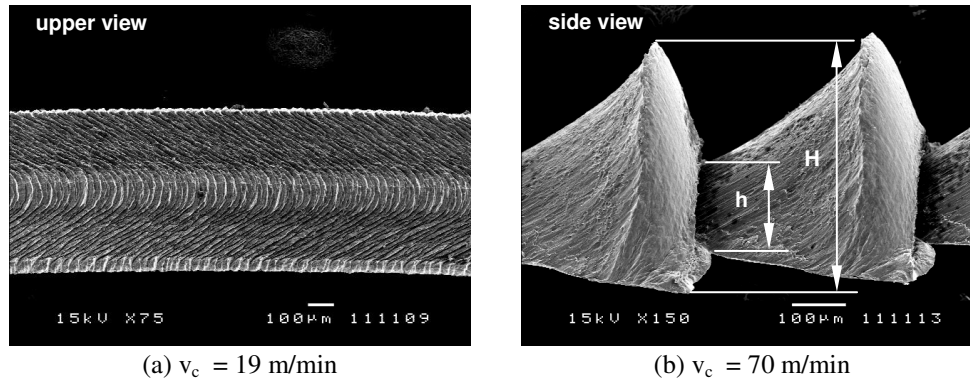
Chip (a) continuous and (b) segmented provided in threading.
